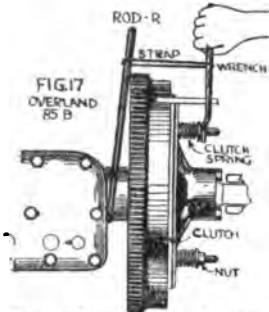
Method of compressing clutch spring to remove or replace nut—see also fig. 8, page 647.
